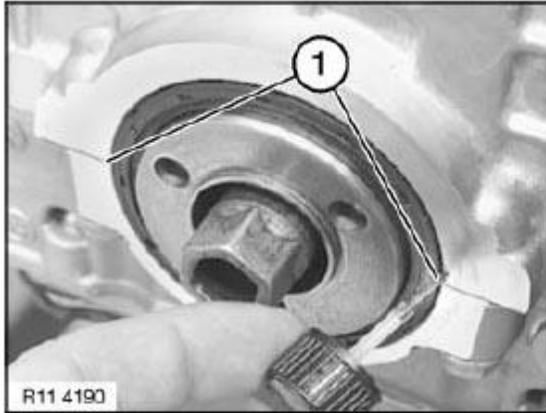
Coating Housing Partition On Engine Block Using Brush Moistened With Loctite Primer
